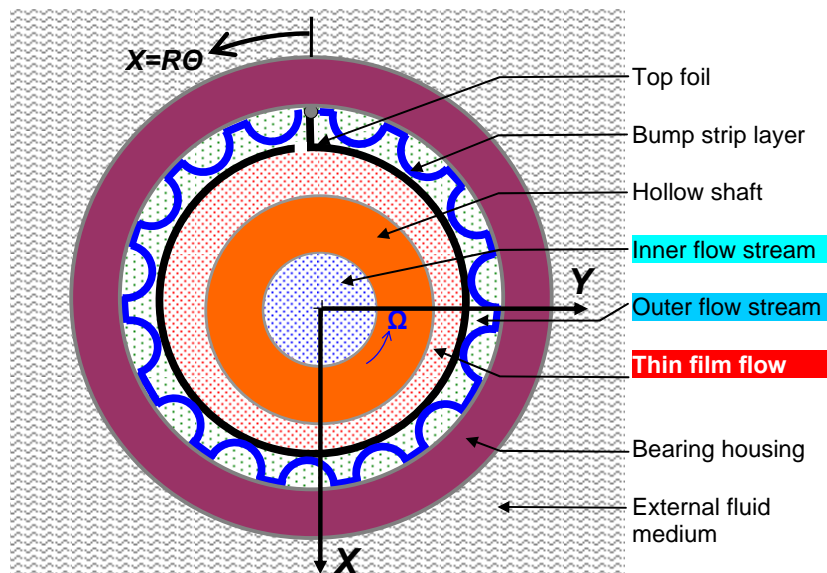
Schematic view of bump type gas foil bearing and shaft. Coordinate systems, major components and cooling flow streams
